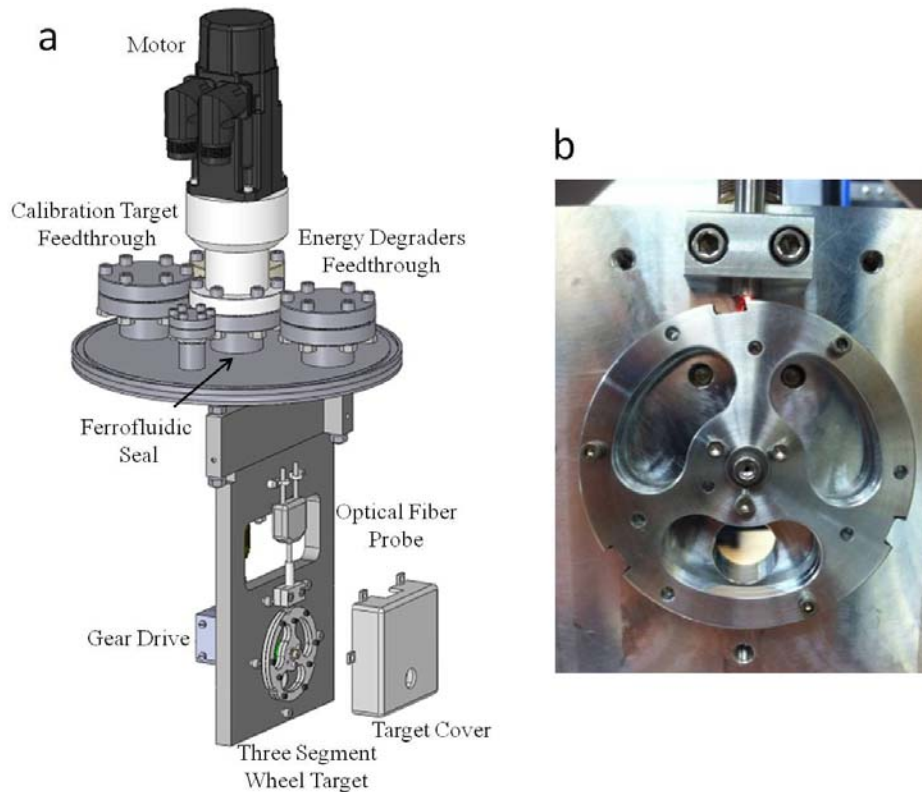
(a) CAD drawing of rotating target wheel assembly, courtesy of Ferrotec Corp. (b) Image of the target wheel, with fiber optic probe positioned above and emitting a red light. The three notches serve as position markers to trigger beam pulsing.
